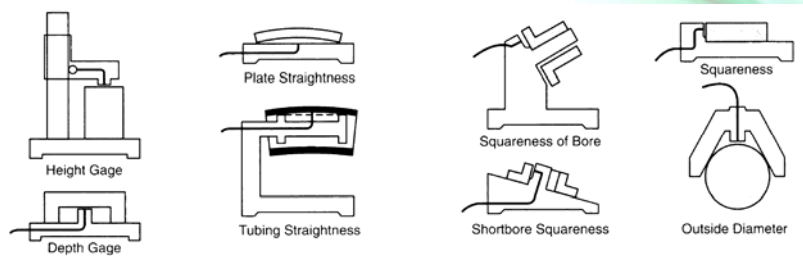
Single jet nozzles form the basic gaging element as in these examples.
